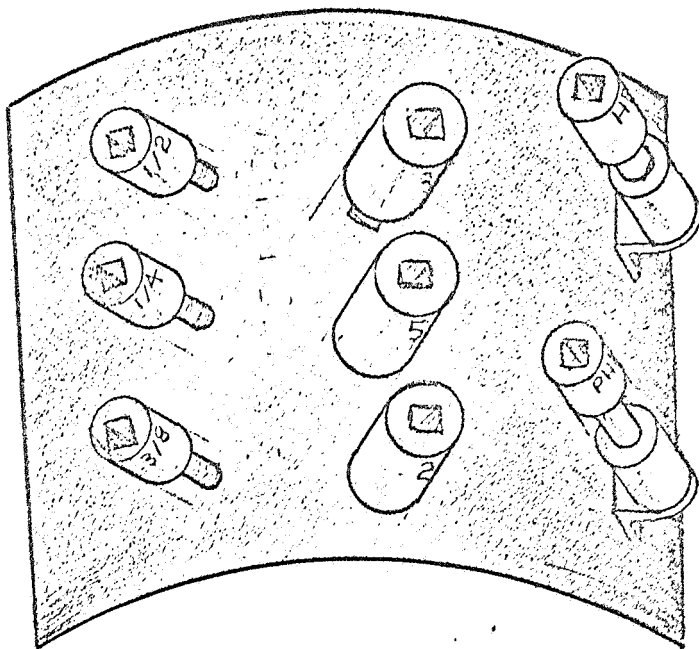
Tool Cuff (Tool Attachment Storage Sites)
